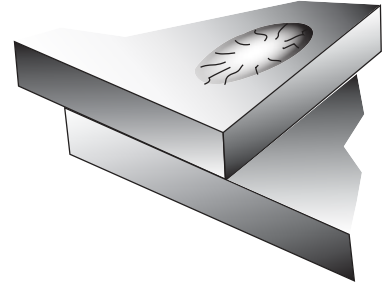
Typical Joint Designs for Arc Welding
